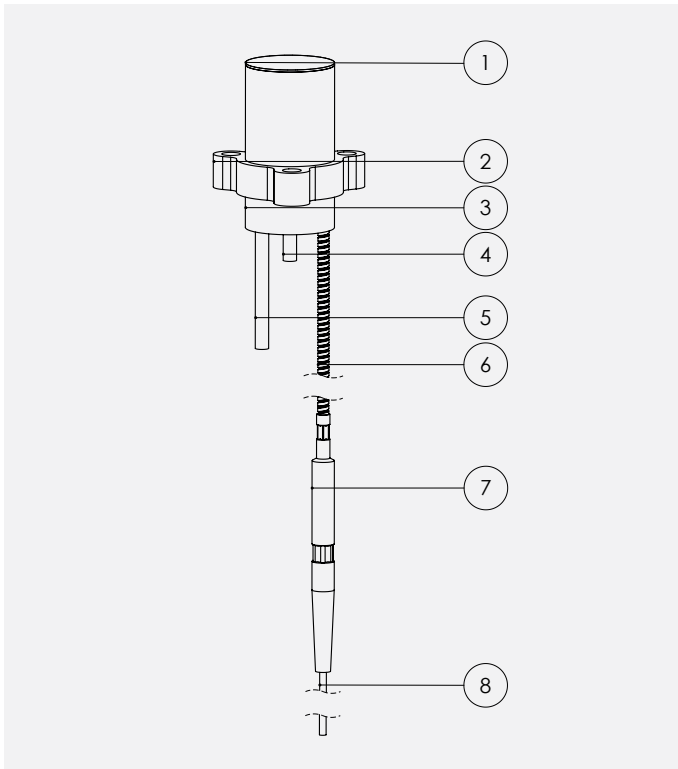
Overview of HFS01: (1) black-coated sensor surface, (2) removable flange, (3) sensor body, (4) cooling water inlet (5) cooling water outlet, (6) high-temperature cable, (7) transition piece, and (8) low-temperature extension cable.
